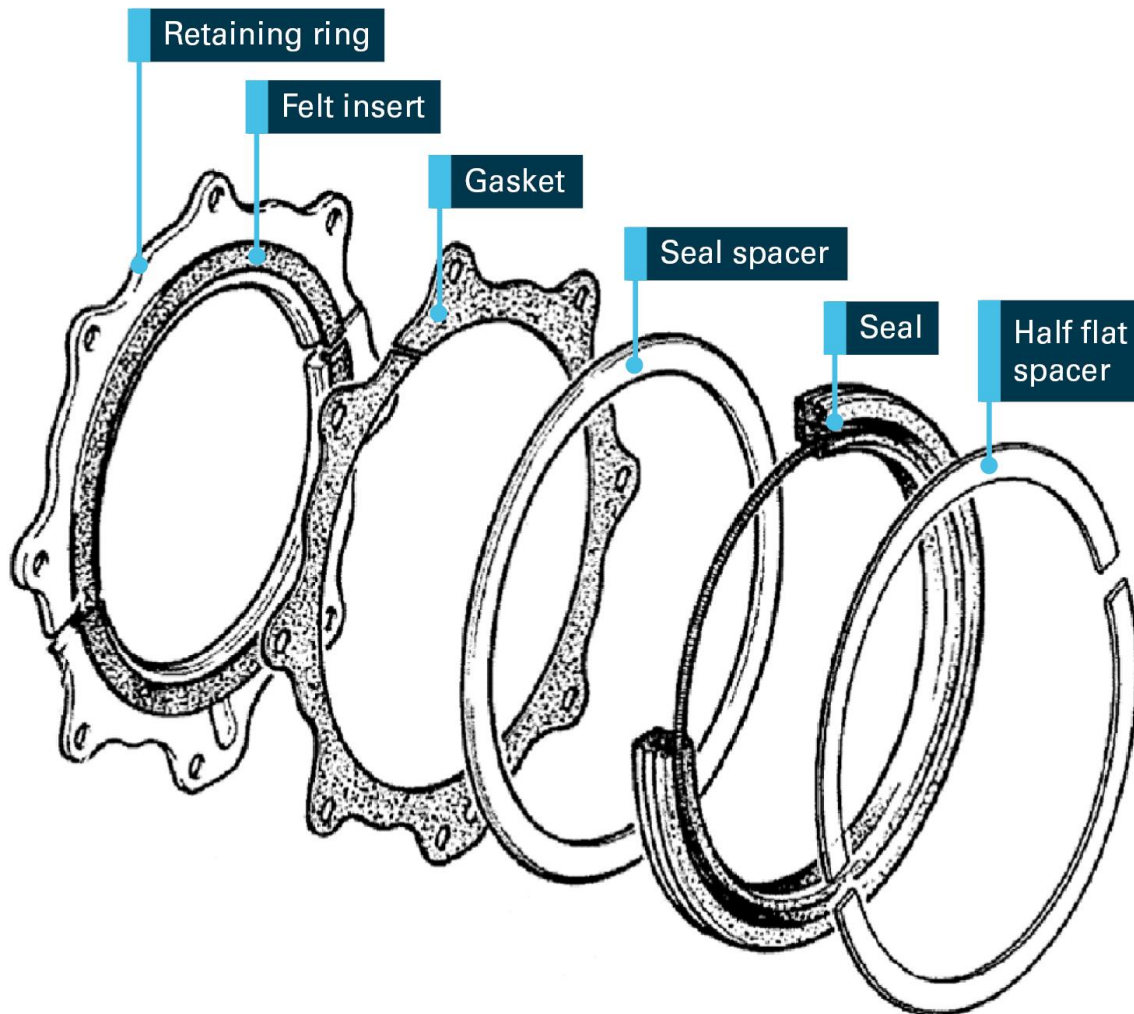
Propeller shaft seal assembly parts diagram in the IPC
